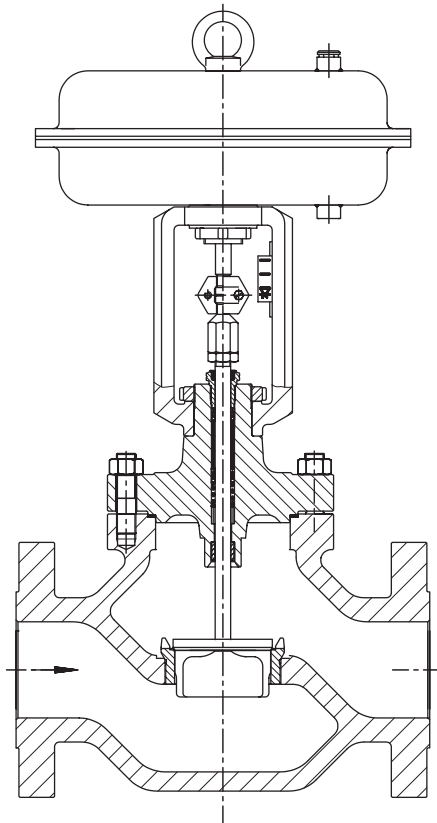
· Type 3251-1 Control Valve with Type 3271 Pneumatic Actuator
